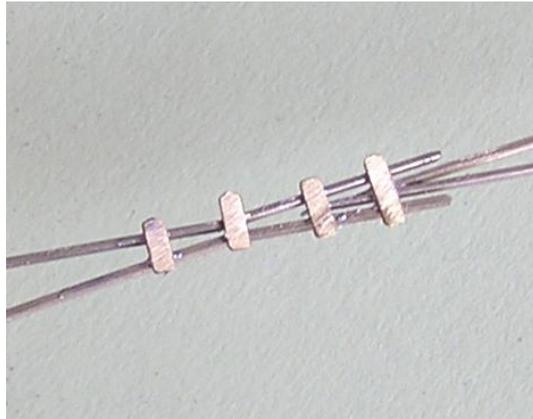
Crossing assembly. The bottoms of the chairplates have been cleaned but they still need trimming to length.
